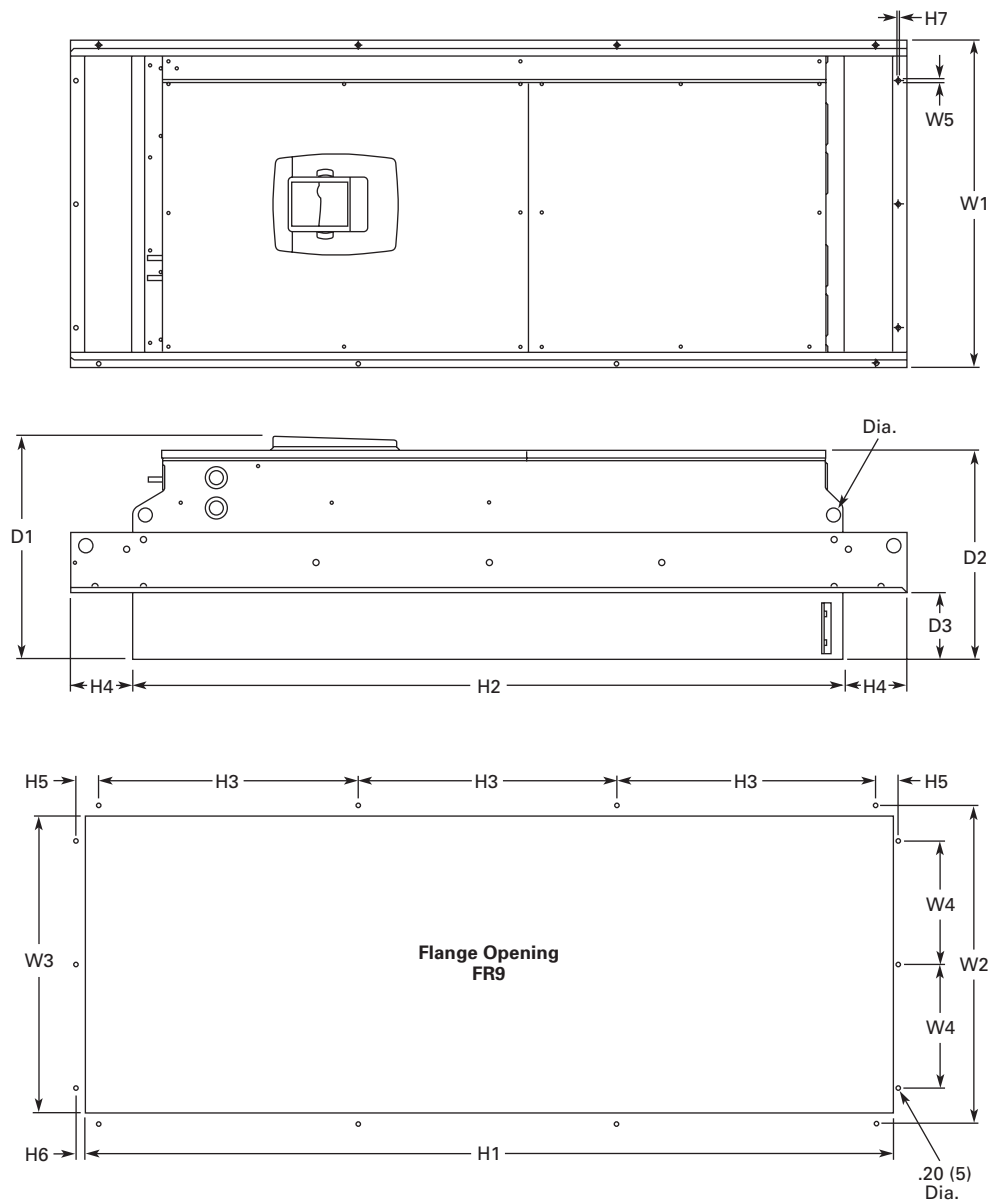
9000X Dimensions, NEMA Type 1 and NEMA Type 12 FR9 with Flange Kit
